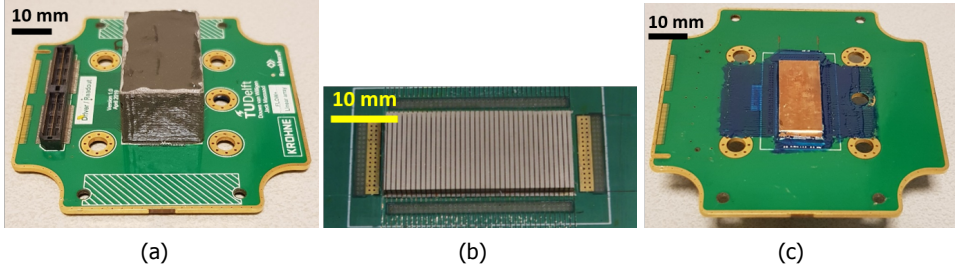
Fabricated prototype of one of the linear arrays. (a) Backing poored on top of the custom-made PCB. (b) Array obtained after dicing the PZ26 plate on top of the PCB and before applying a copper ground foil. (c) PZT array with a  $20\ \mu\text{m}$  thick copper ground foil layer.
